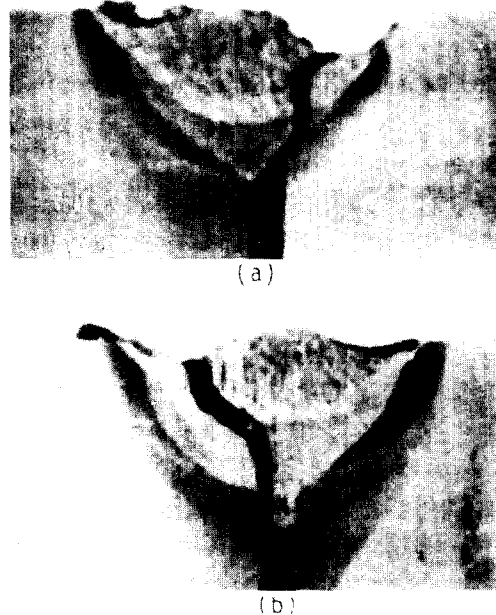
Typical macro-cracks in the multi-pass underwater welded zones of TRC specimens
